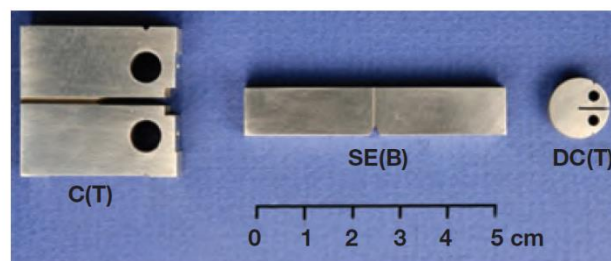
Three commonly used specimen configurations for the J-R curve test. Left to right: Standard compact C(T) specimen, single edge bend SE(B) specimen, and standard disk-shaped compact DC(T) specimen. [86]
